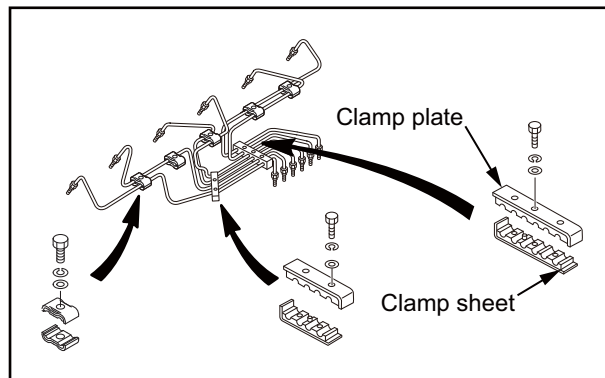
High Pressure Fuel Injection Pipe and Clamp Seat - Inspect and Replace
